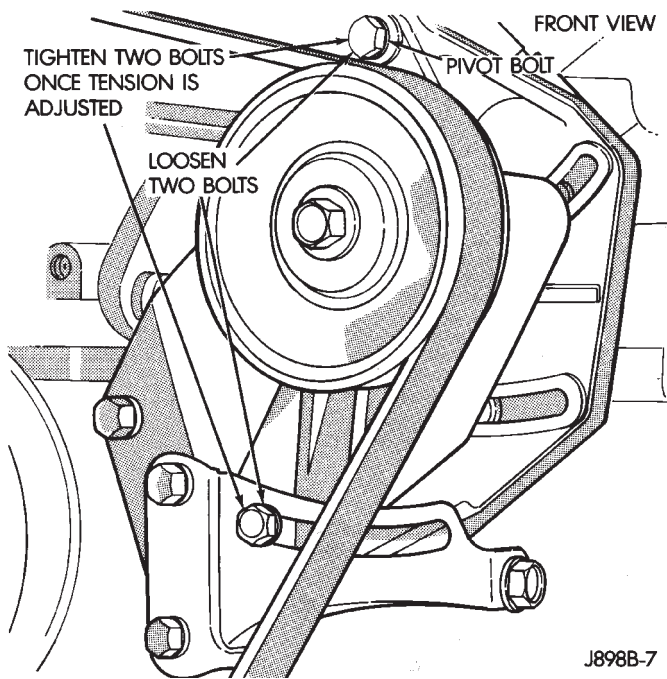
Idler Pulley Rear Mounting Bolts—Except XJ With 4.0L
